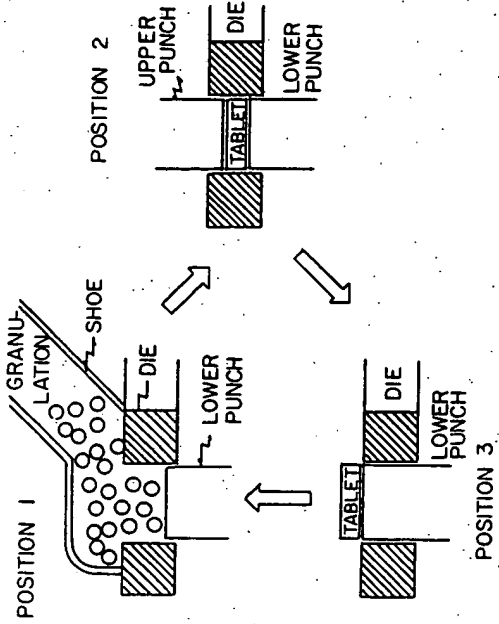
Steps in the formation of a tablet on a single punch (eccentric) machine.
